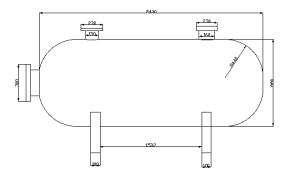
ELLIPTICAL HEAD DIMENSIONS
